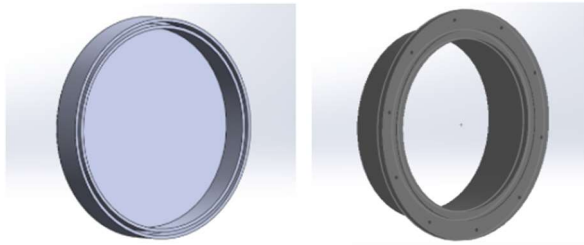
Static end cap, Figure 7: Collar of the removable end cap
